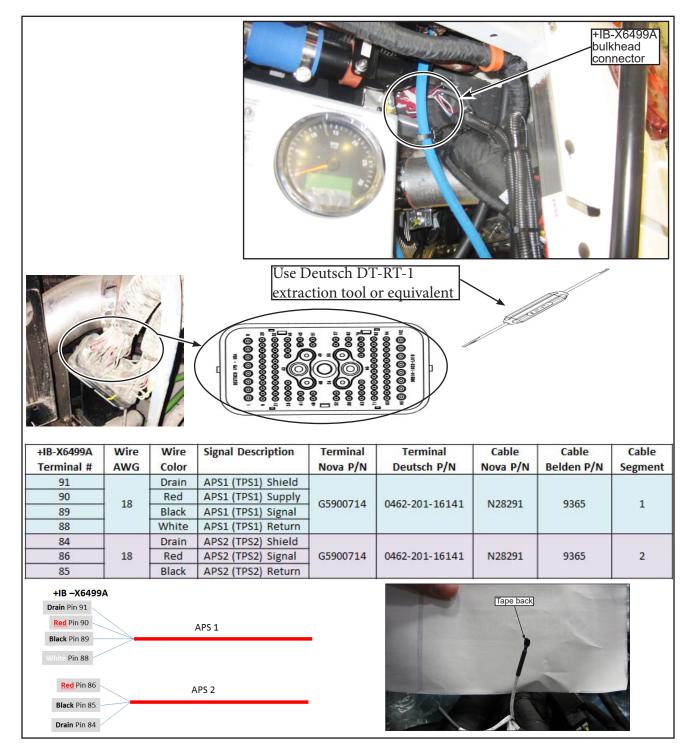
Install the Seven Wires From the Bypass Cable Wire Kit
